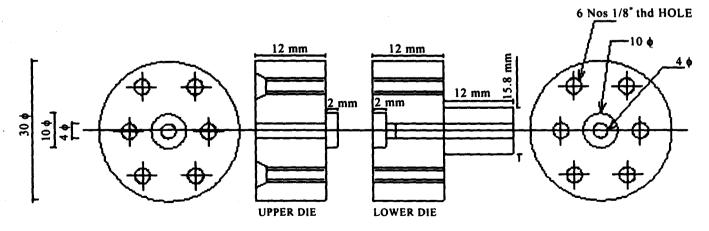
Details of specimen holder (upper and lower dies) for circular shaped miniature sample
